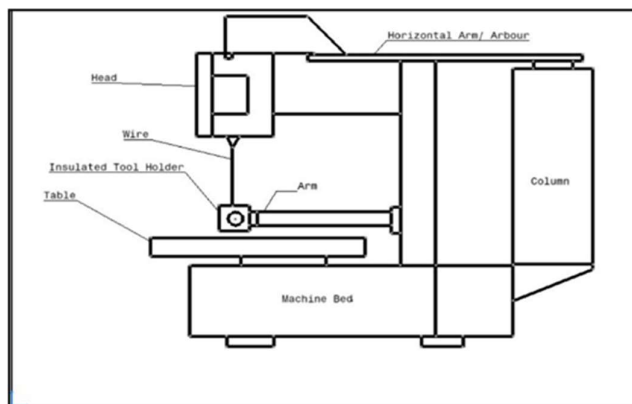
Schematic Diagram of typical electrical discharge wire cutting machine.
